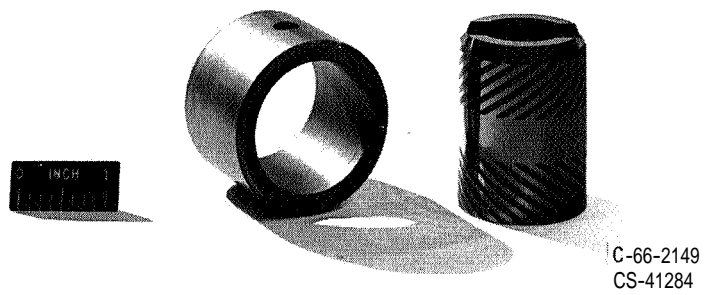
Plain bearing (MP-3) versus Herringbone groove journal (K-14) after test.
